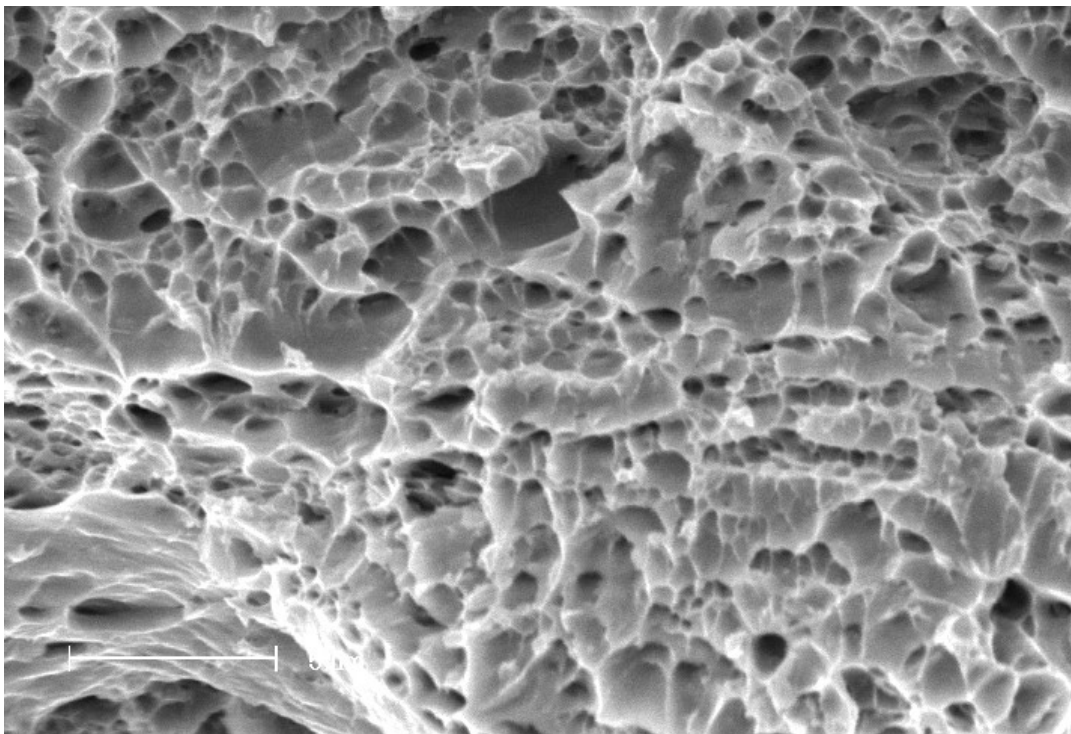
Microvoid Coalescence Fracture Surface
